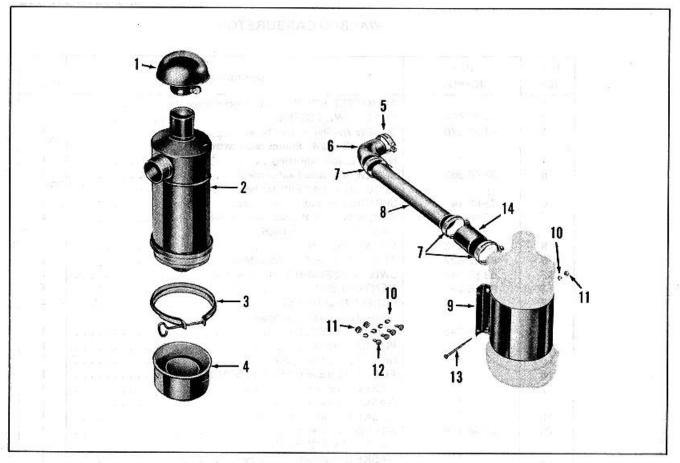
LO-64 SIDE MOUNT AIR CLEARNER ASSEMBLY.
